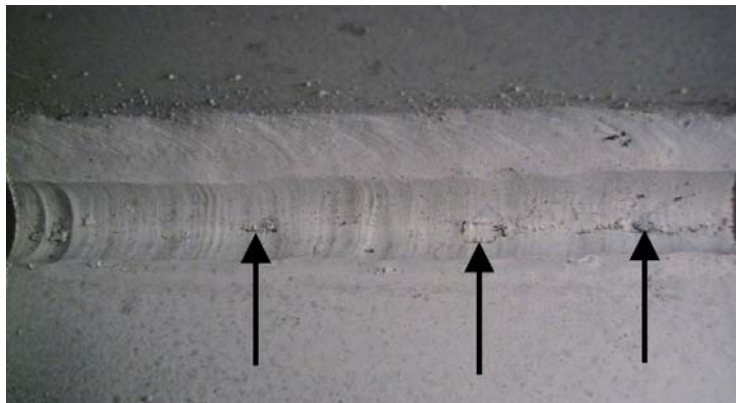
Weld toe lap-type flaws produced by hammer peening revealed by magnetic particle inspection (arrowed).
